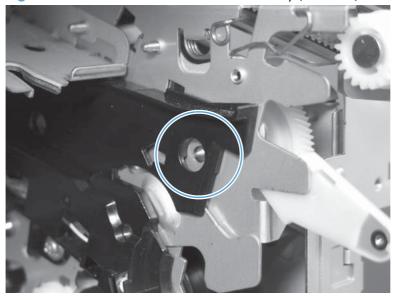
Reinstall the main drive assembly (10 of 11)
